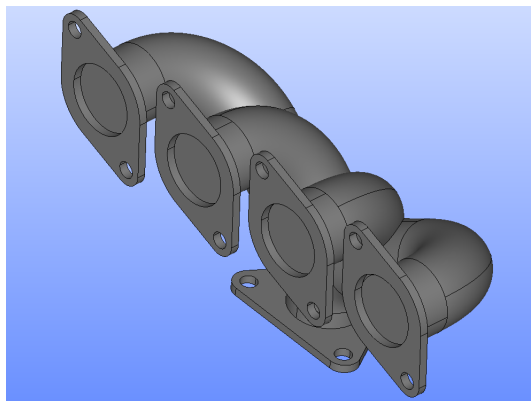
The CAD model of the intake manifold designed along with mounting flanges.
